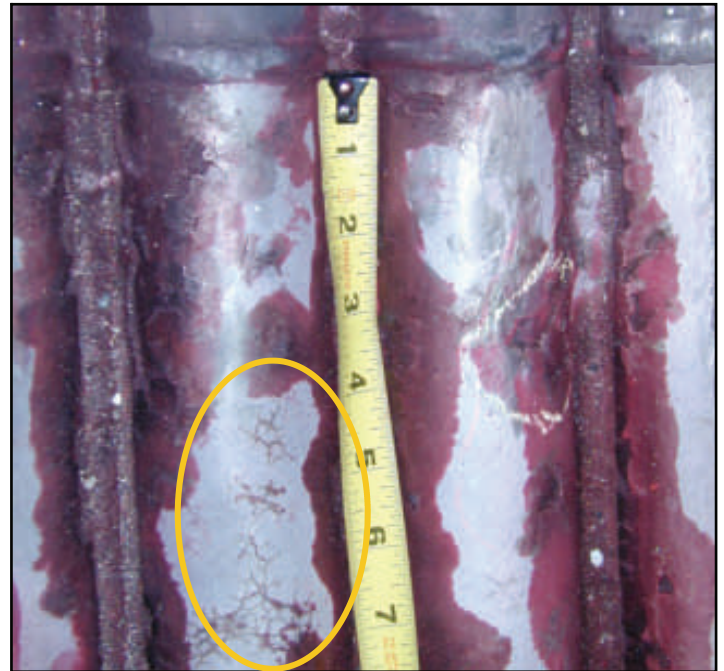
SCC cracking on a stainless steel clad floor tube can lead to spalling (circled).
